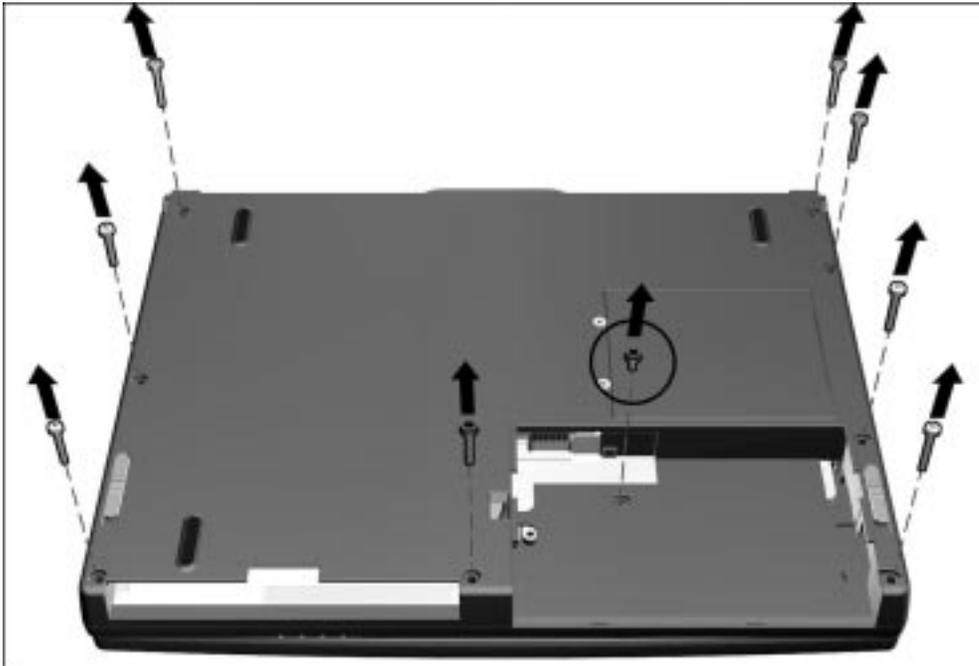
Removing the Keyboard/CPU Cover Assembly Screws
